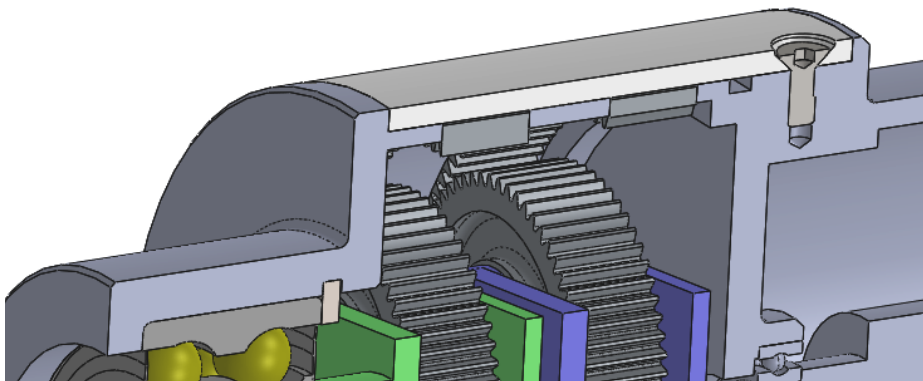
first example of planetary housing, with two separated parts (front cover and cylindrical body) and radial screws
